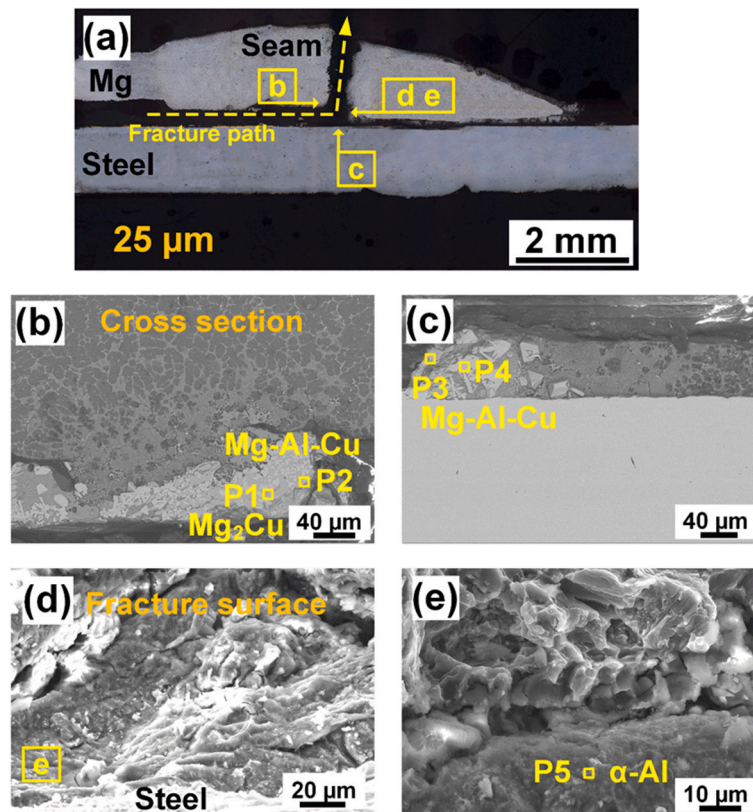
Fracture analysis of magnesium/steel joint with Cu coating thickness of 25 μm : (a) fracture path of the joint; (b) weld side section analysis; (c) steel side section analysis; (d-e) fracture morphology analysis of steel side.
